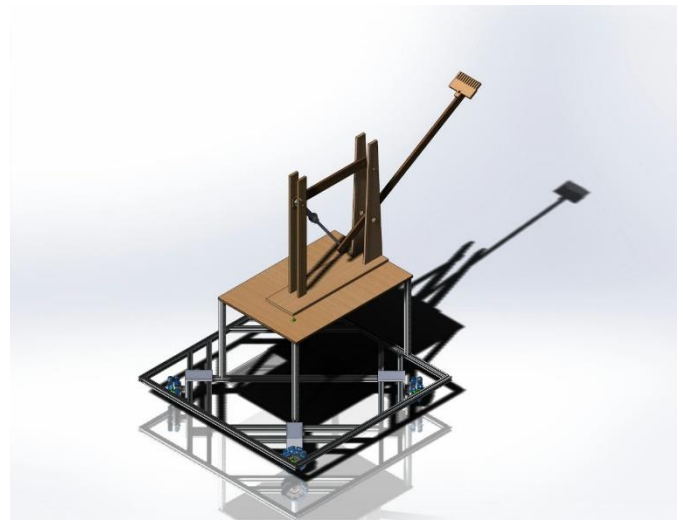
CAD DESIGN: ISOMETRIC VIEW OF PROTOTYPE-2 OF AUTOBOT
